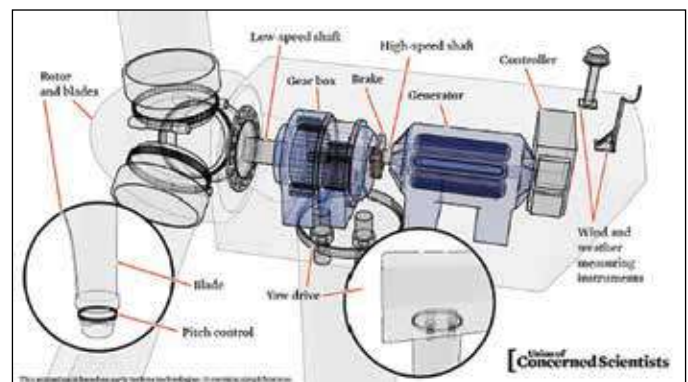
View of Components of a Gearbox Driven Wind Turbine. (Source: Union of Concerned Scientists)
